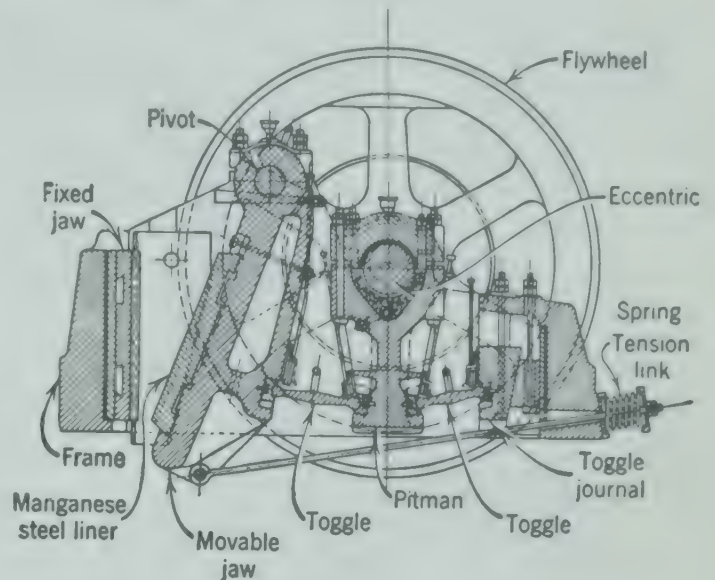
Sectional drawing of Blake-type jaw crusher. (Allis-Chalmers Mfg. Co.)
